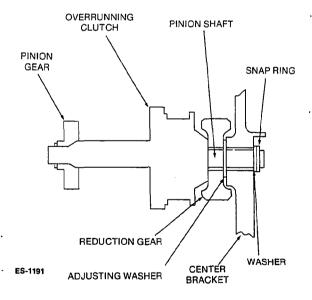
ADJUSTING PINION SHAFT END PLAY
